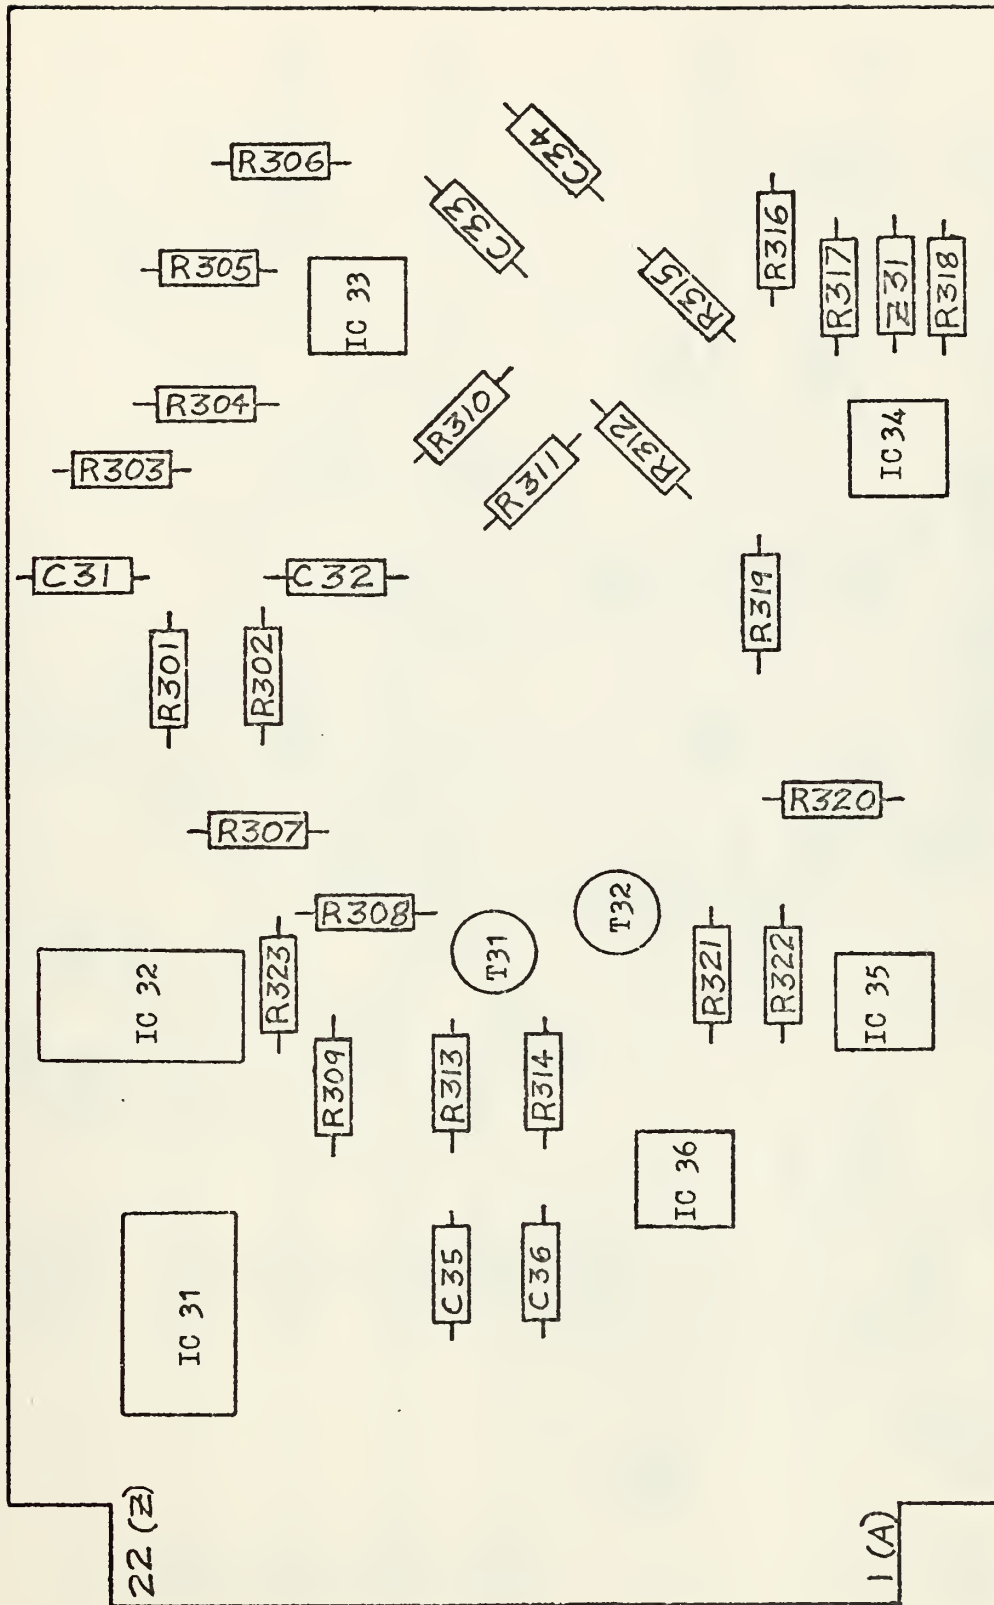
CORRELATOR BOARD (COR) COMPONENT LAYOUT
